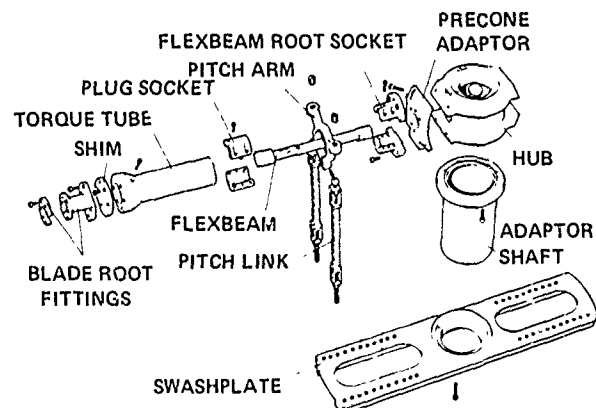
Exploded view of bearingless model rotor flexbeam and hub.
